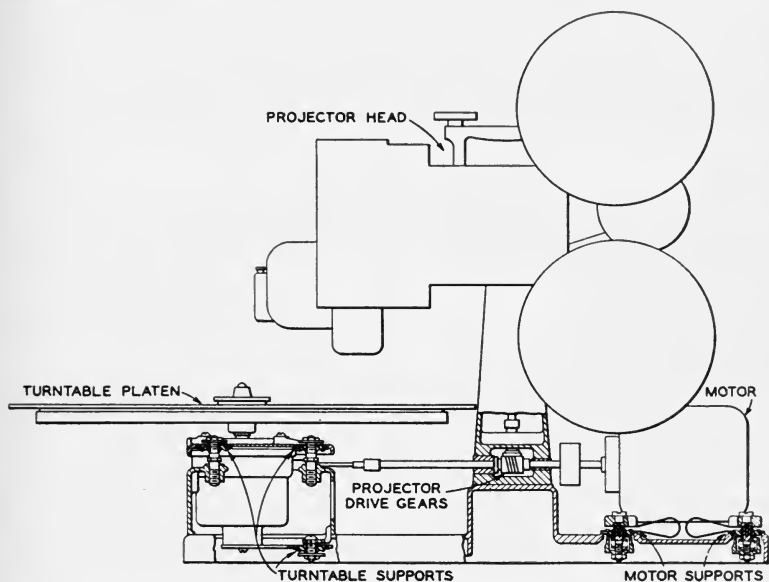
Diagrammatic drawing of projector-turntable unit showing method of mounting the motor and turntable.
